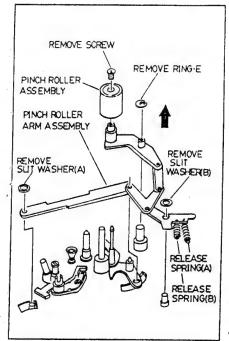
Pinch Roller Assembly and Pinch Roller Arm Assembly Removal
